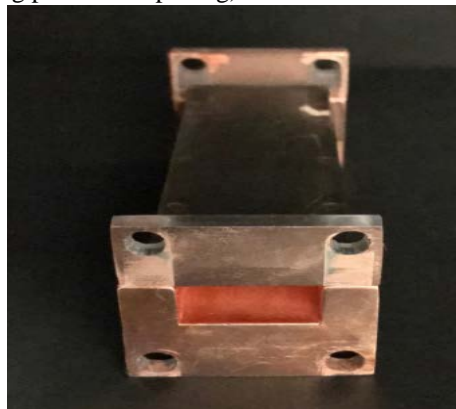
Lego-like assembly of metalize 3D printed waveguide structure.
